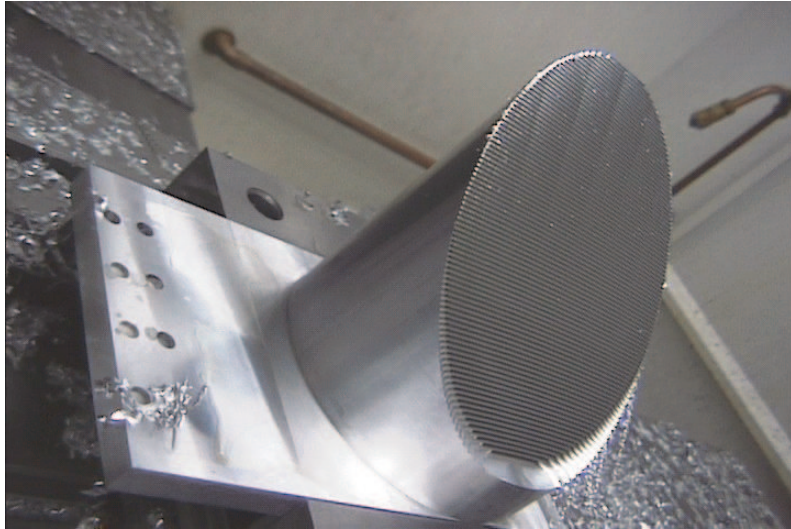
Off-axis parabolic mirror machining at CNC machine. The machine grooves are still visible after the first cut.
